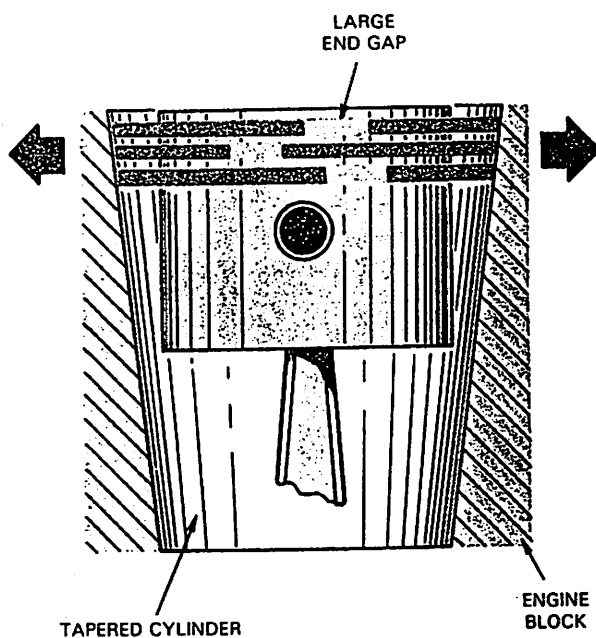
Rings expand at top of cylinder. Note large end gaps.
